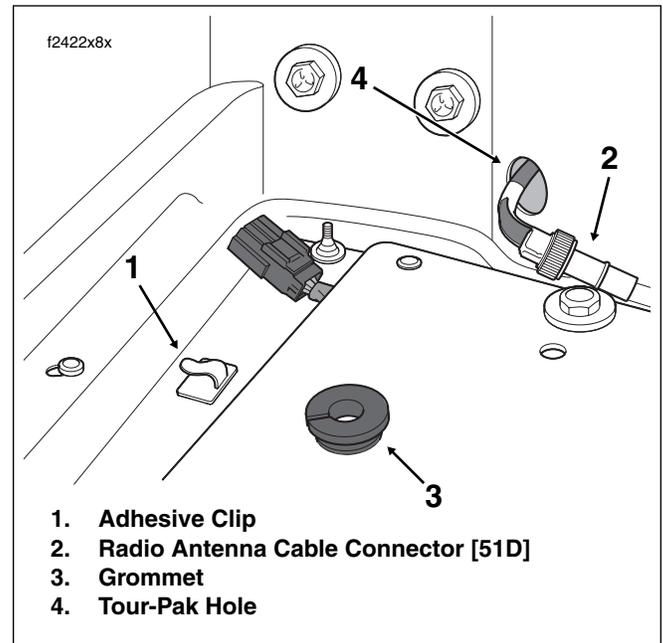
Feed Main Harness Thru Tour-Pak Hole
